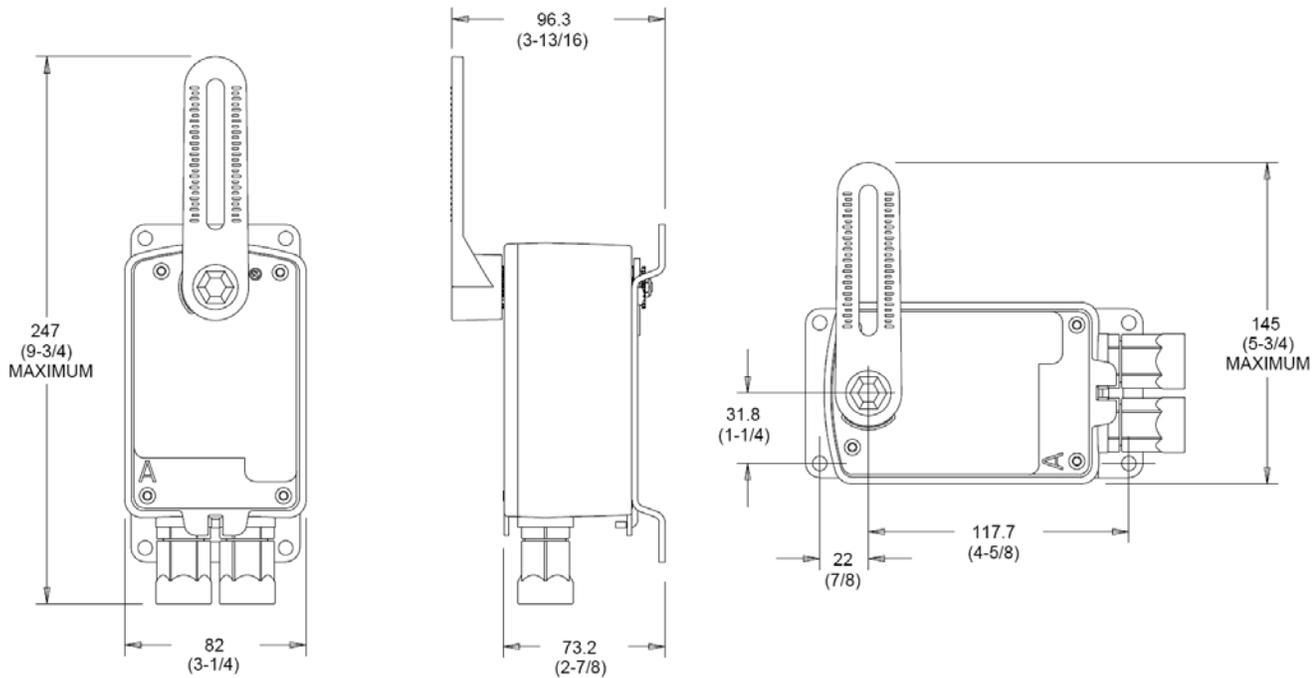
M9203-115 Remote Mounting Kit Overall Dimensions, mm (in.)
